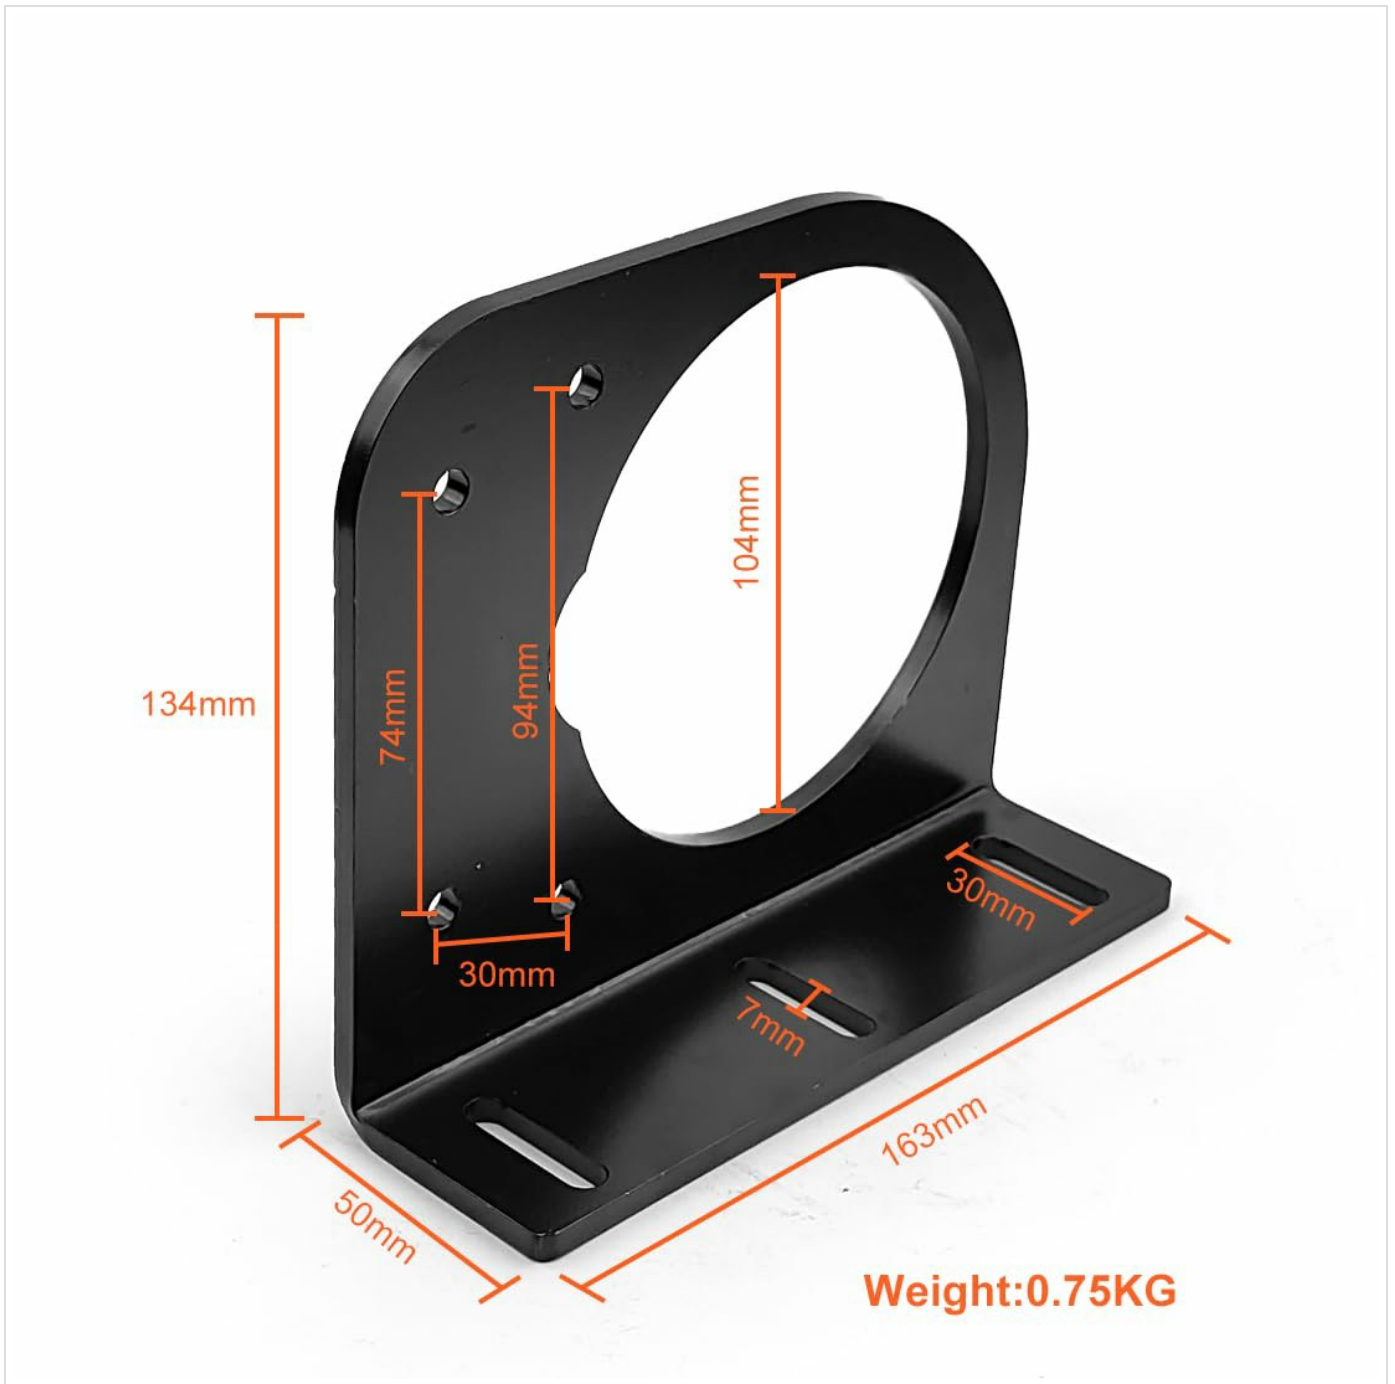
Side view of the motor bracket with key dimensions (134mm height, 163mm length, 50mm width).
